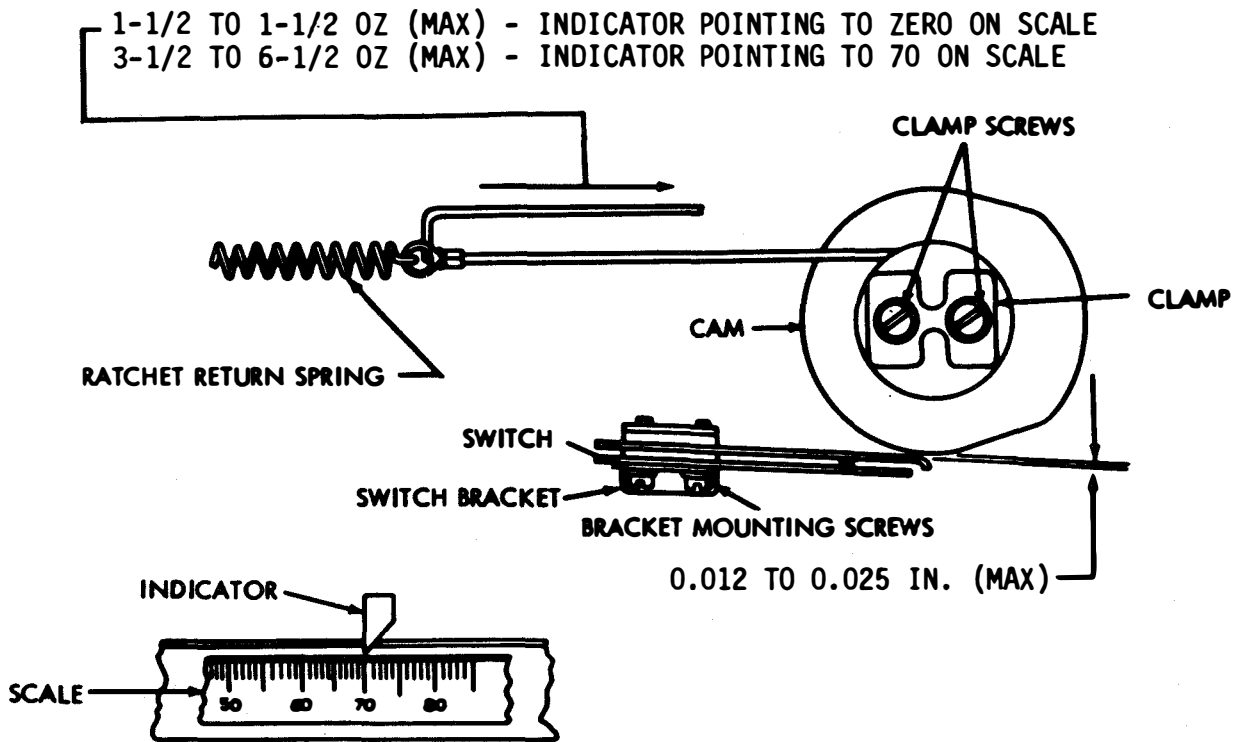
Character Counter End-of-Line Switch and Ratchet Drum Assembly Return Spring
